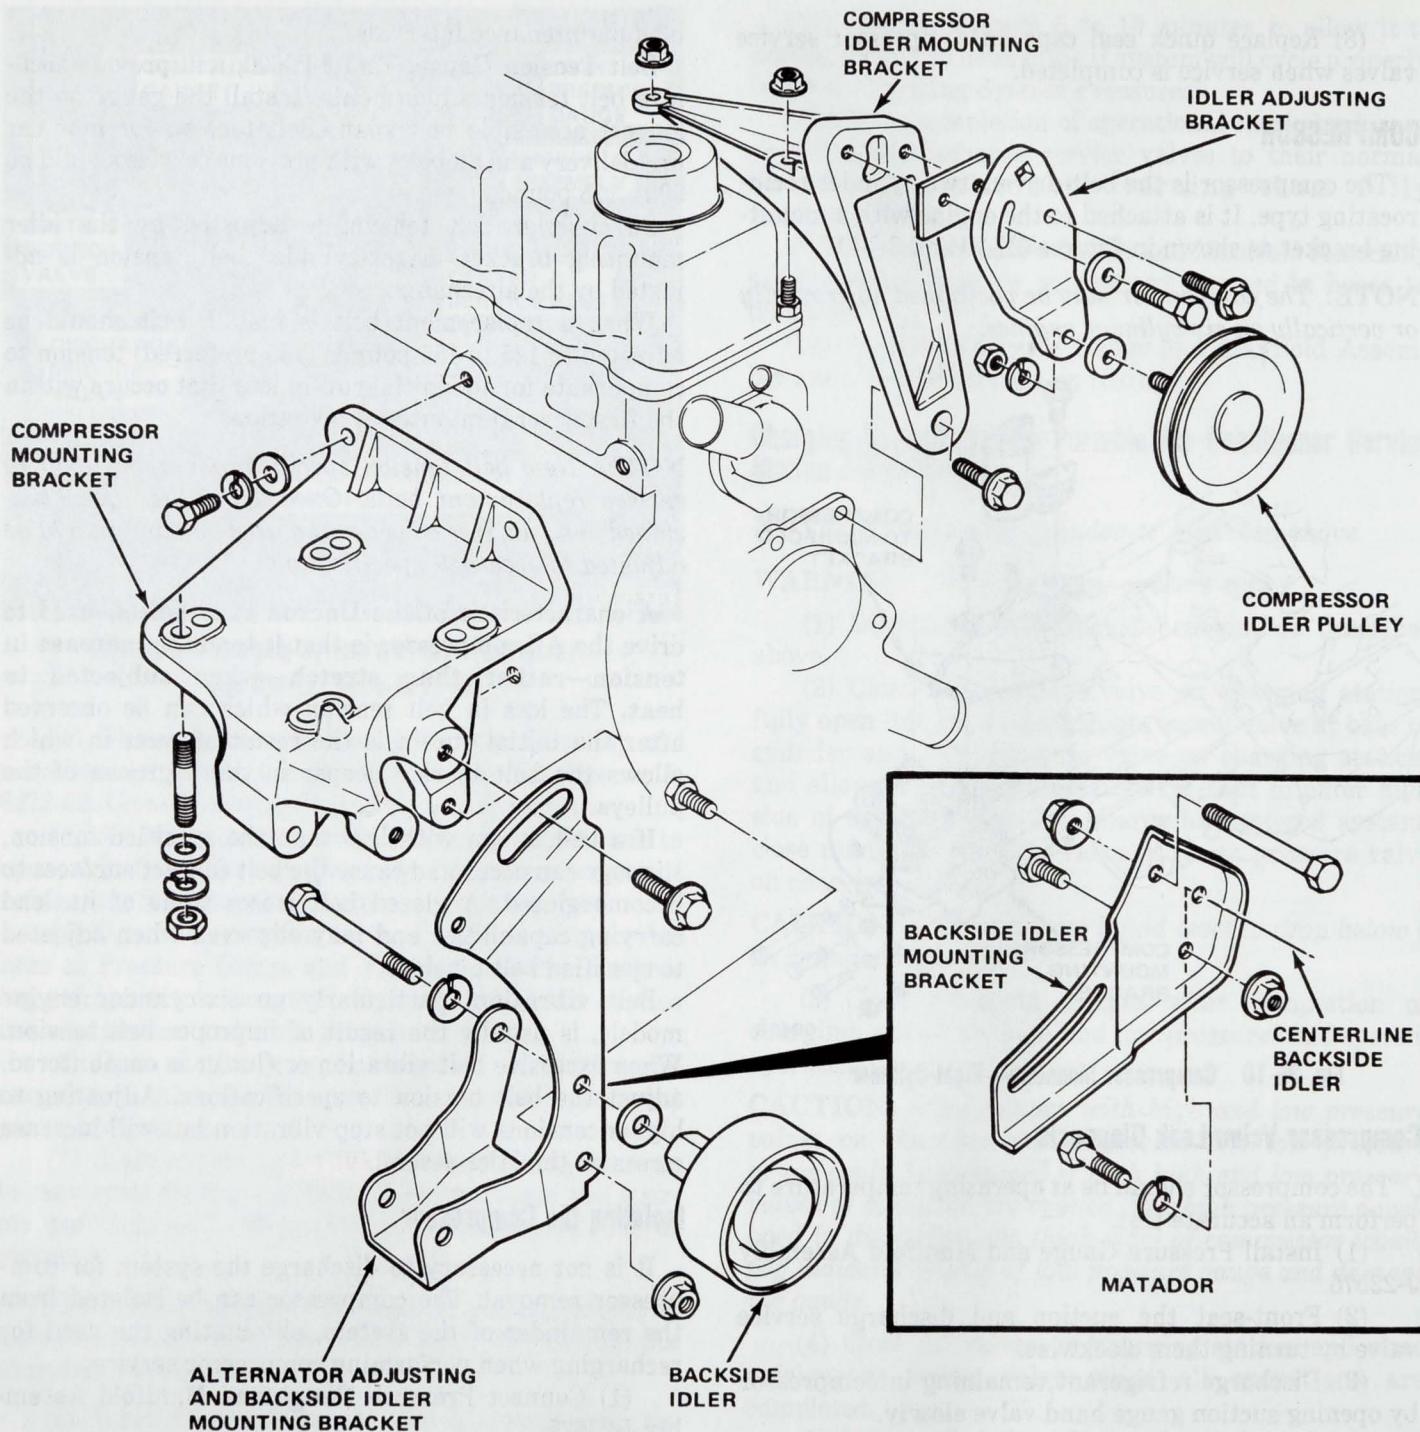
E-11 Compressor Mounting—Typical Six-Cylinder
